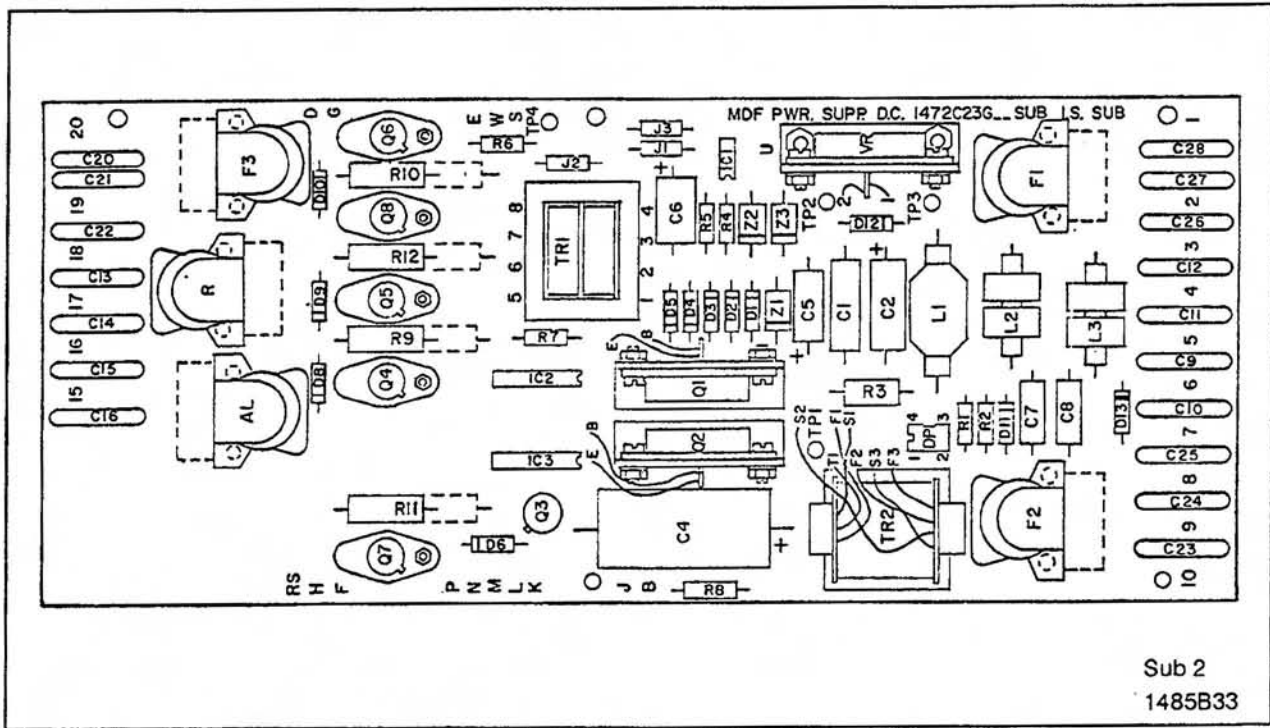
Component Location of Power Supply Board (dc) - Three Frequency Settings
